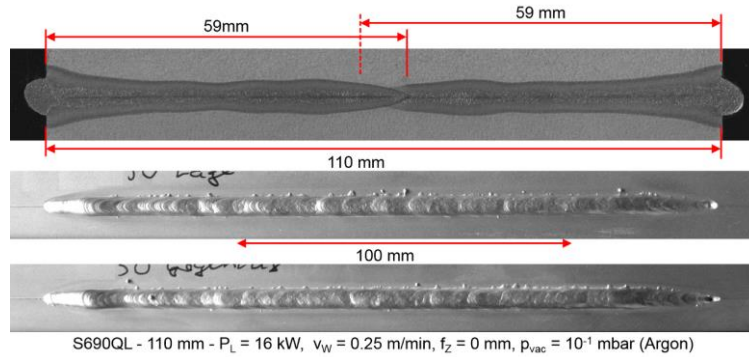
Connection weld on 110 mm thick plates of S690QL in double-sided, single-pass technique
